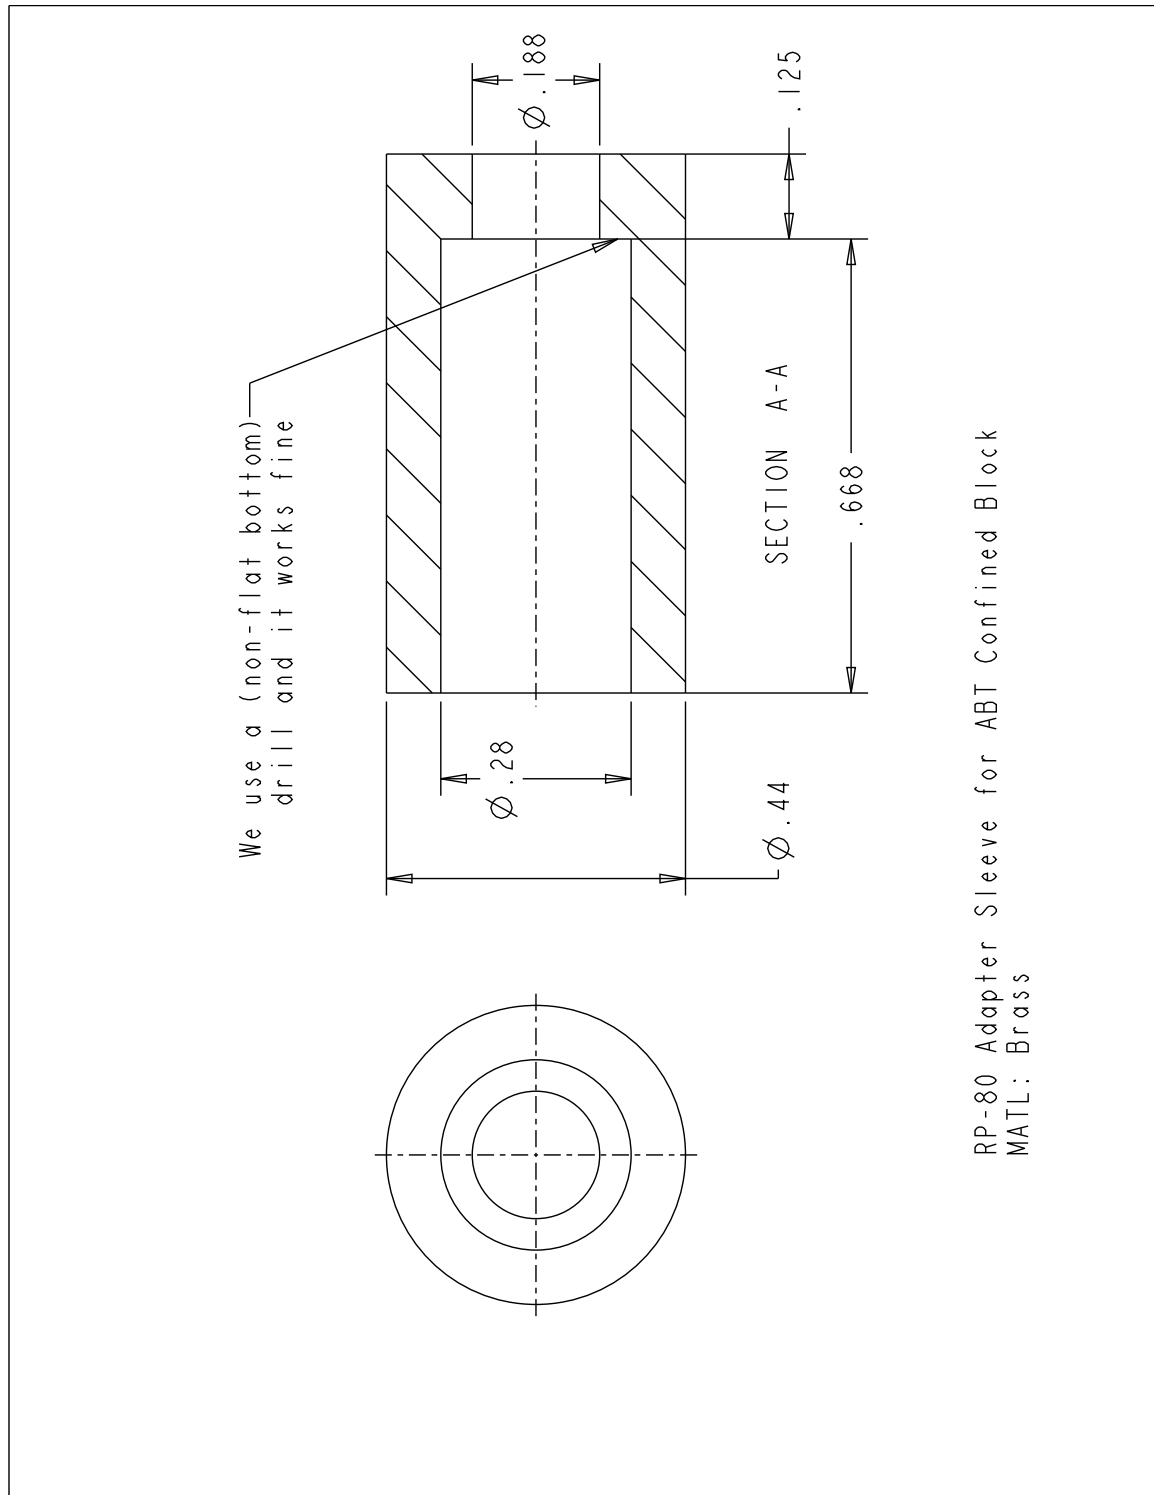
Brass piece used to hold charge in block. Dimensions are for first block and top plate. Modifications for the second block are the diameter at 0.5 inch and the internal counter sink is 0.817 inch long instead of 0.668 for full enclosure of the charge. The overall length of the piece does not need to be exact. Units are in inch. Adapted from Drew Coverdill.
